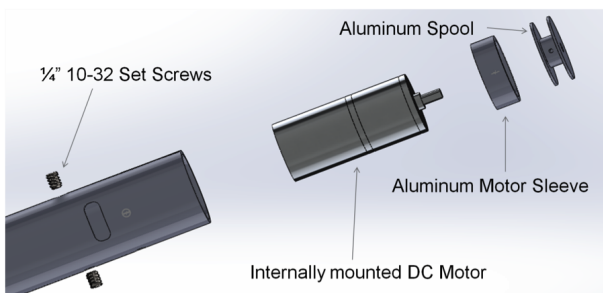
Assembly of actuators into the Rods of the the prototype lander
